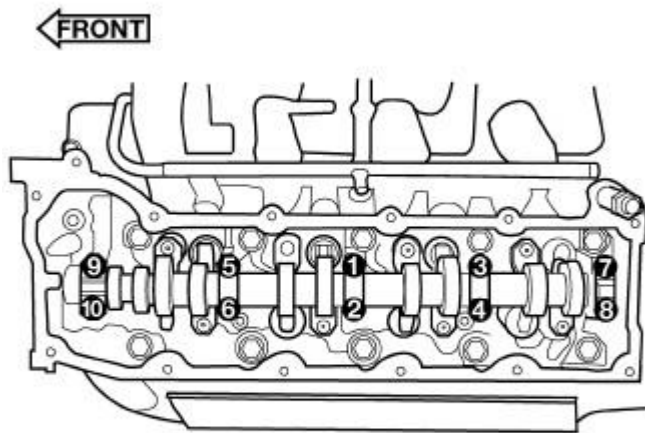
Removal/Installation Sequence Of Camshaft Bearing Cap Retaining Bolts
